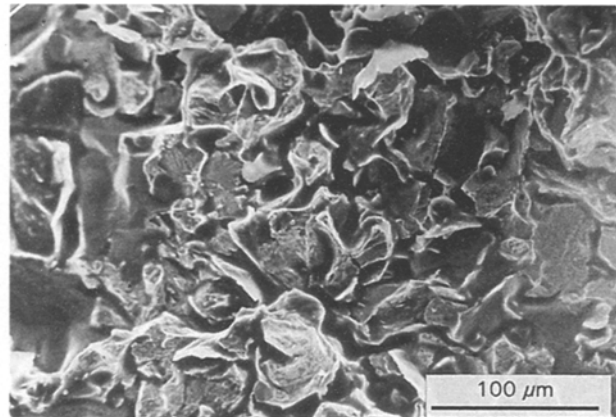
Fractograph of Alloy D specimen taken 30 mm from chill end and cast using a 25 mm chill.
